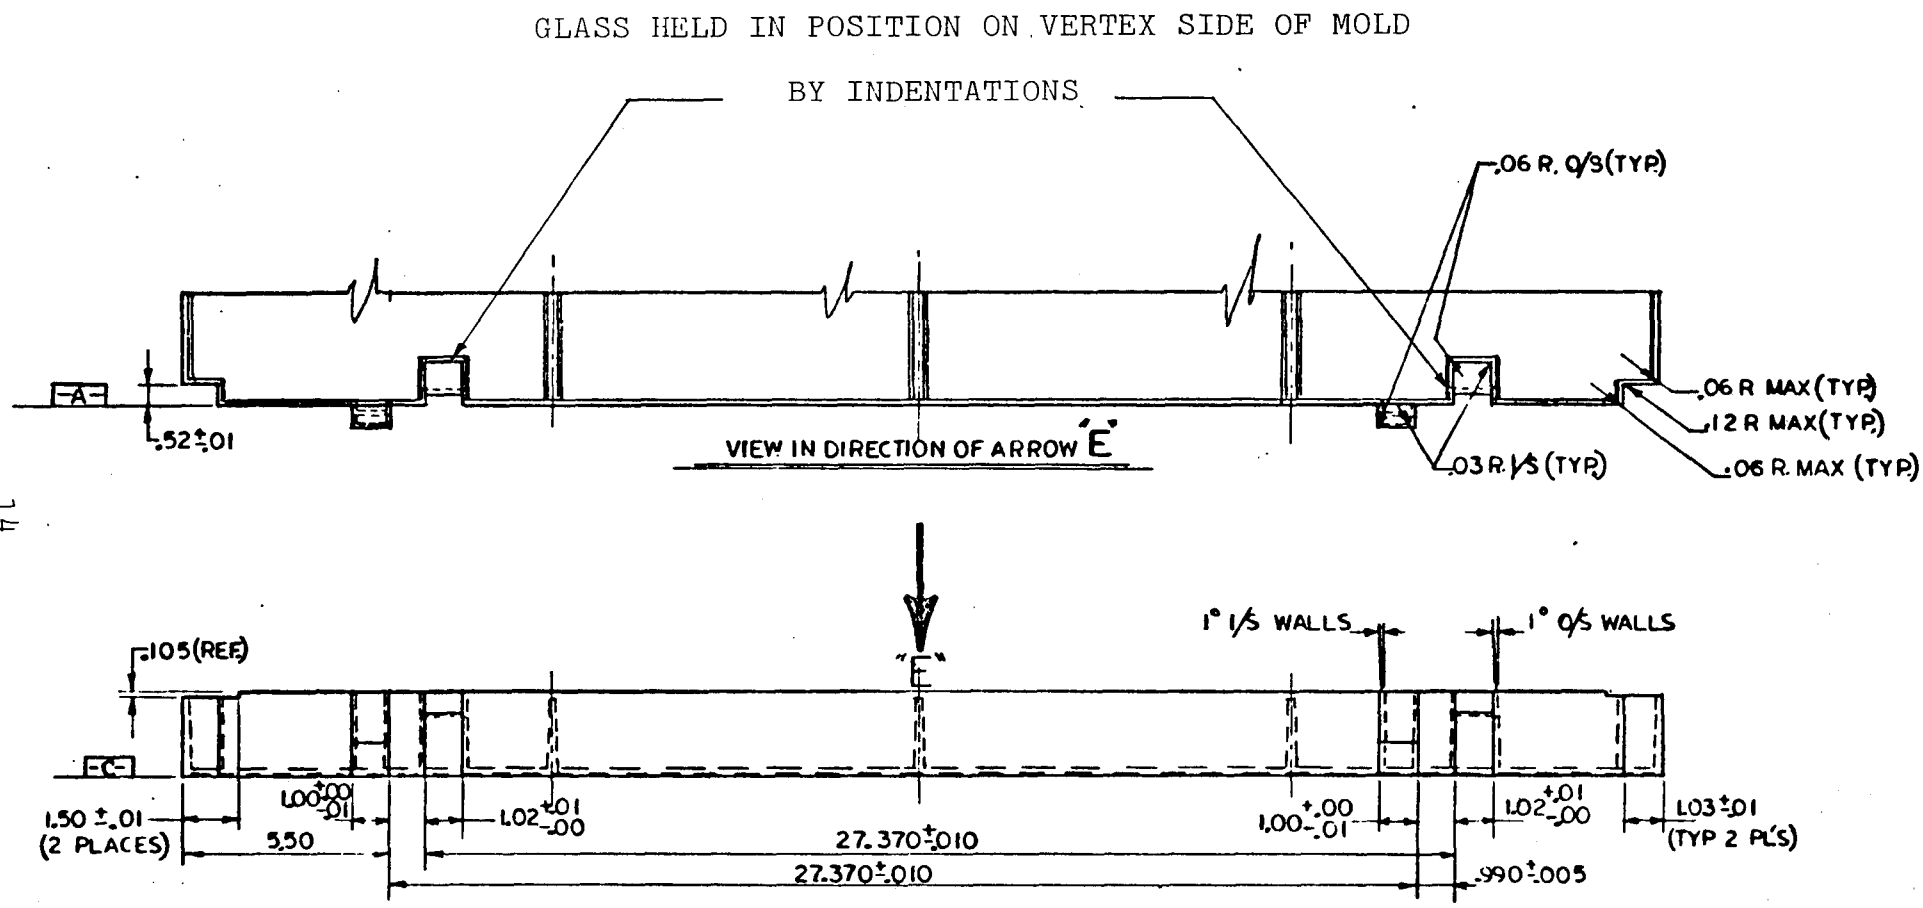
Glass Positioning Concept Using Pre-molded Parts
